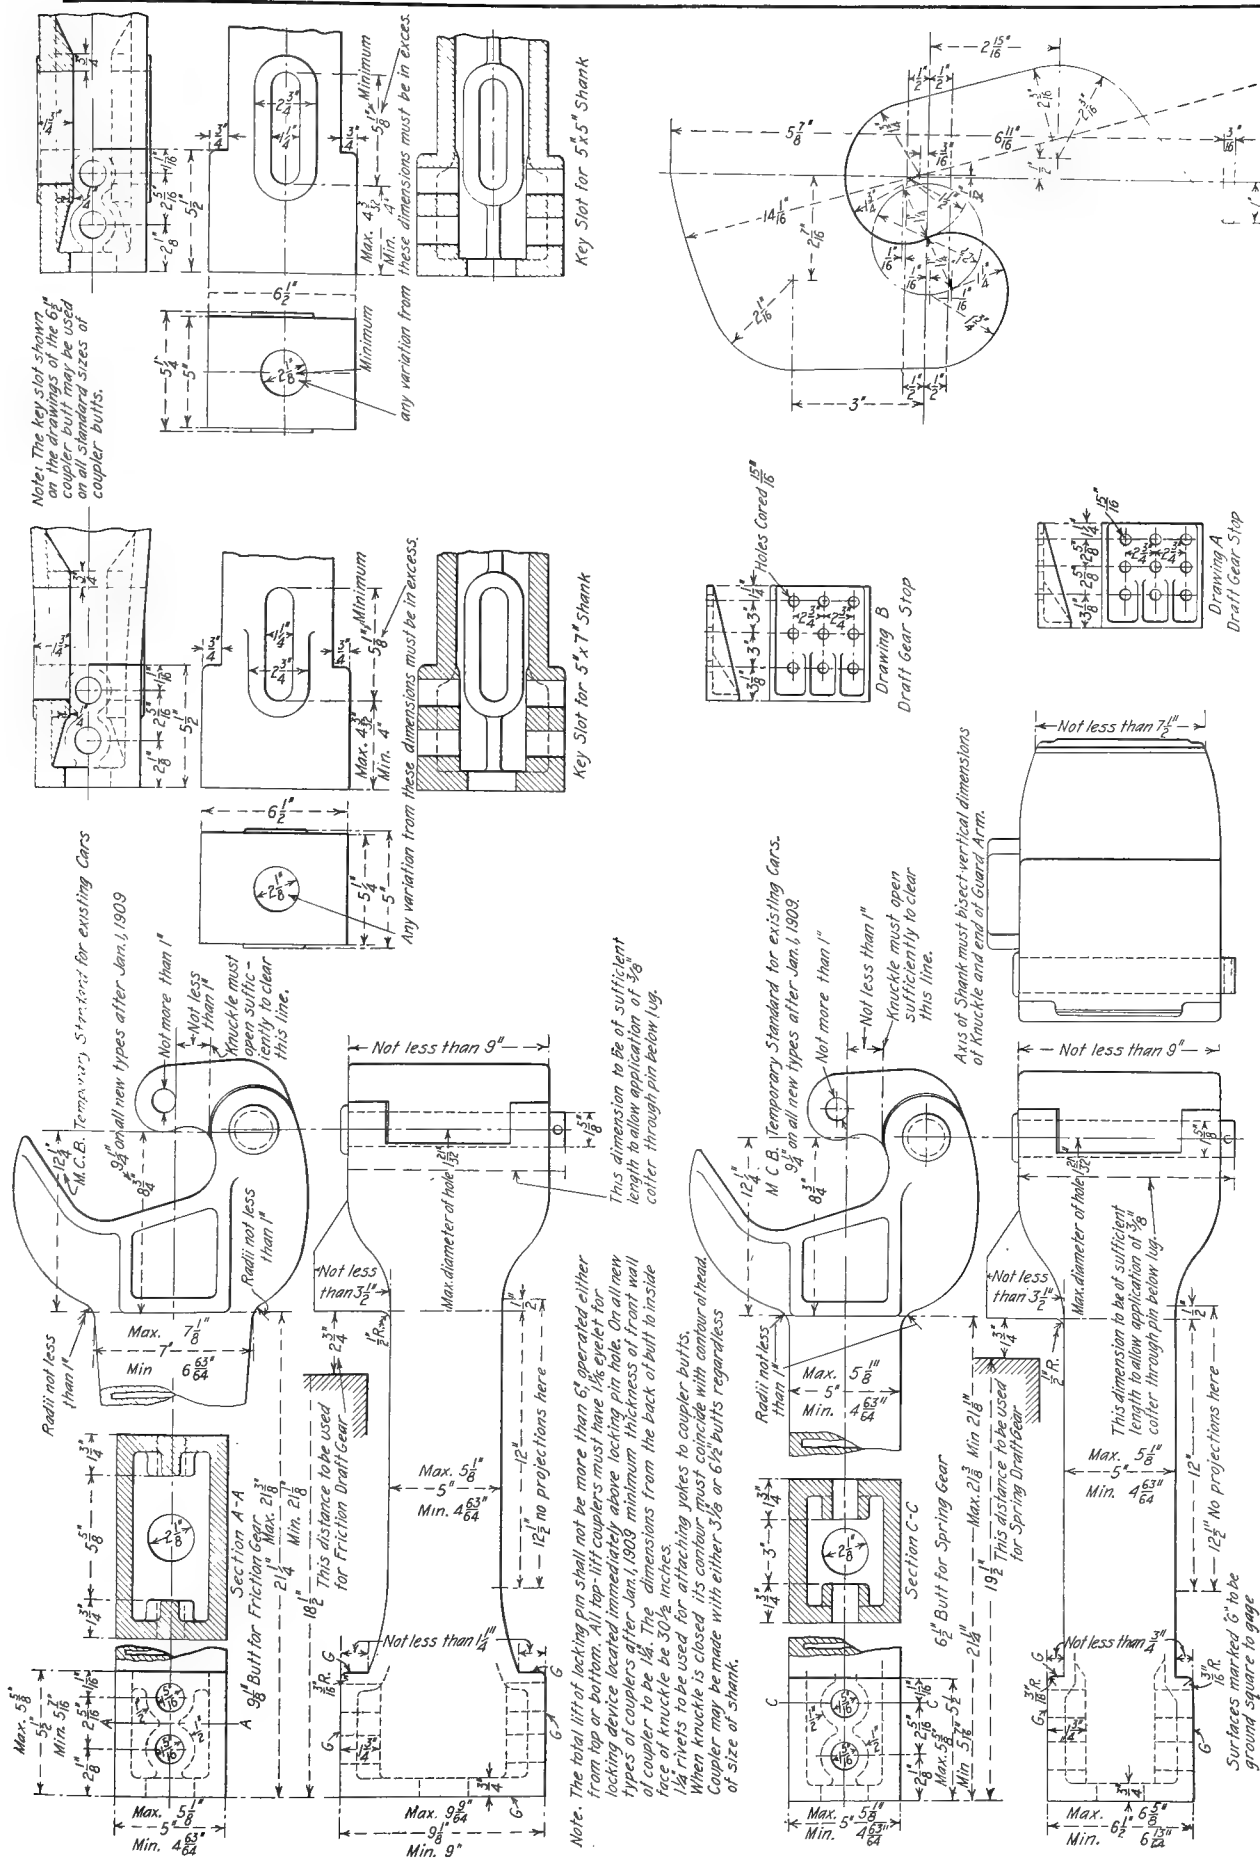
M. C. B. Standard Automatic Coupler, Contour Line, Draft Gear Stops and Key Slots for 5 in. by 5 in. and 5 in. by 7 in. Coupler Shanks. (M. C. B. Sheet 23.)
